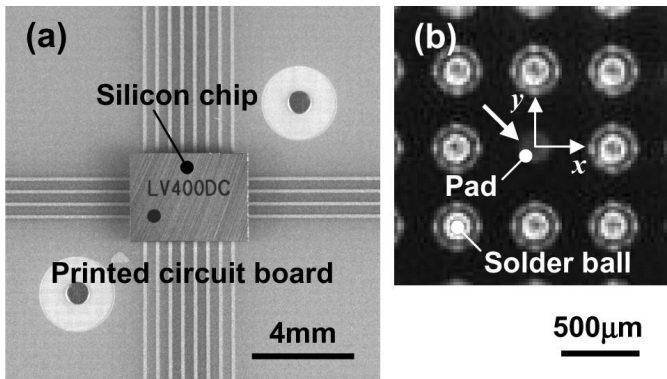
Examined wafer level package. (a) Whole view of the package mounted on the printed circuit board. (b) Back-wall view of the package before mounting. The defective joint is indicated by an oblique arrow.
